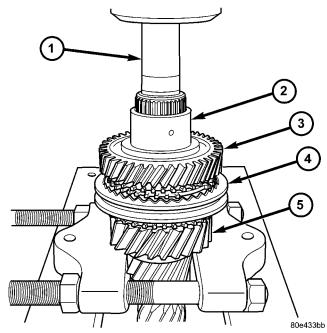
Bushing, 3rd/4th Gear and Synchronizer Removal
